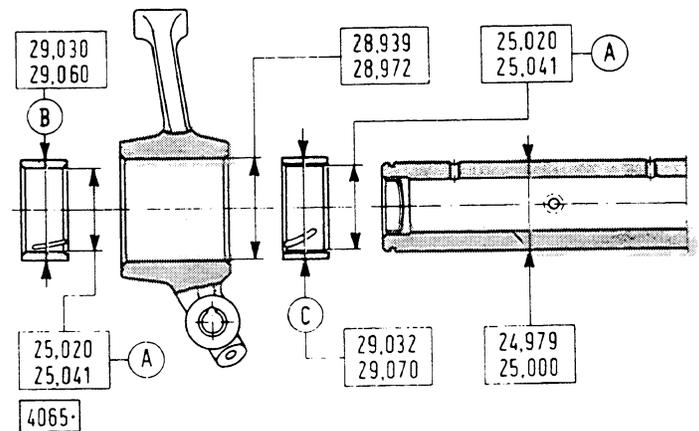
Rocker, Sleeve Bearing and Rocker Shaft Dimensions
